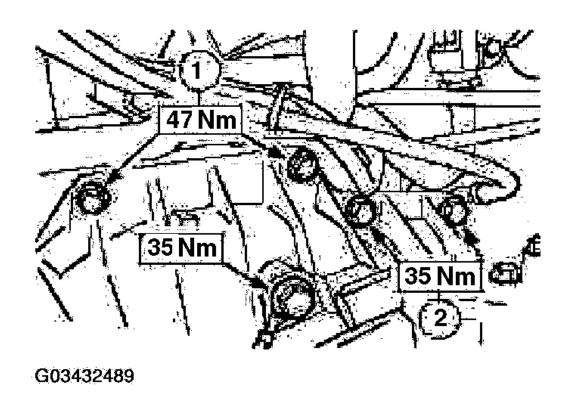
Installing Transaxle Upper Flange Bolts And Starter Motor Bolts Courtesy of FORD MOTOR CO.
